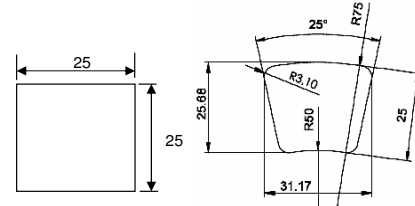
Permanent magnets dimensions in millimeters. (a) square; (b) sectoral.
